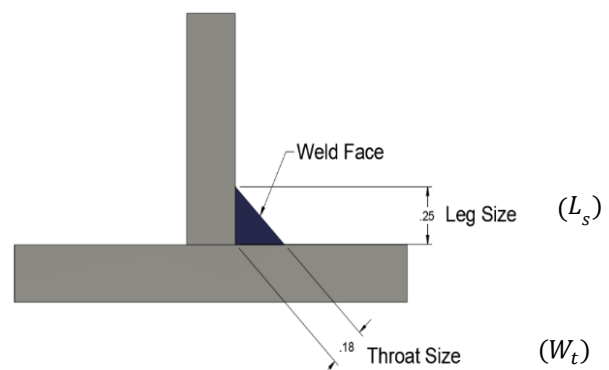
Cross-Section of Fillet Welded Tee Joint.
